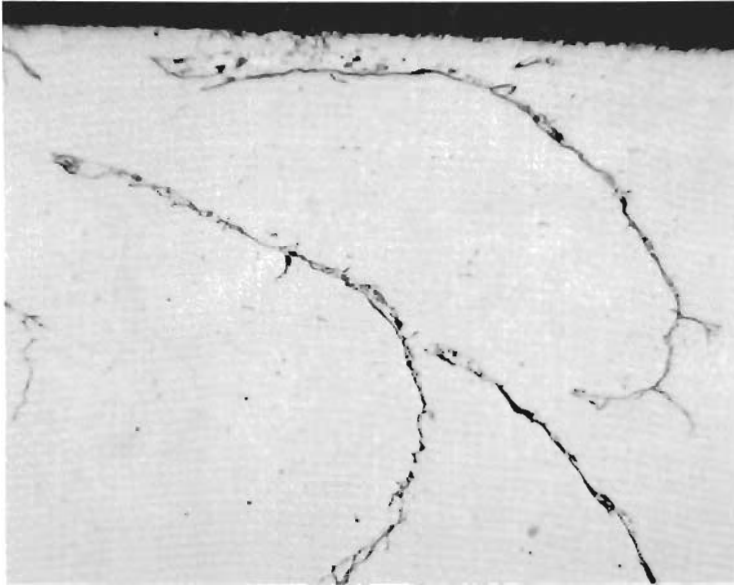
Gear tooth section, 100 \times . Unetched. Rolling contact fatigue. Crack origin subsurface. Progression parallel to surface and inward away from surface.
